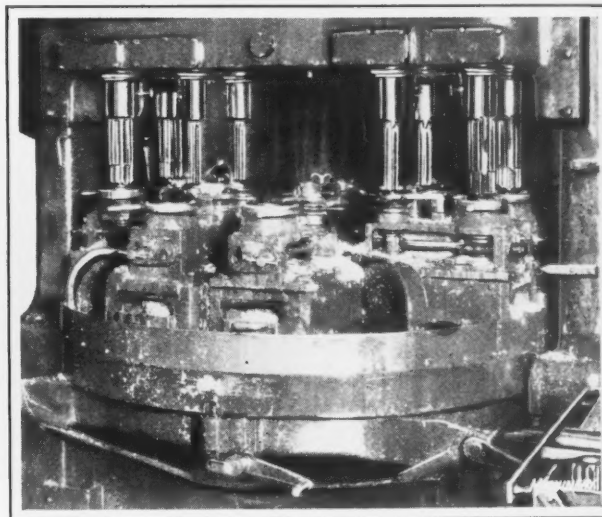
Rough- and finish-reaming Connecting-rod Bearings
